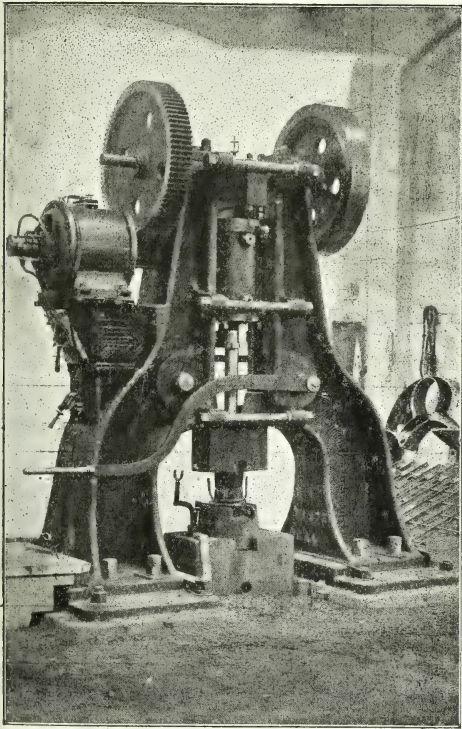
PNEUMATIC HAMMER DRIVEN BY A THREE-PHASE MOTOR OF 10 B.H.P. OF THE SLIP-RING TYPE.
